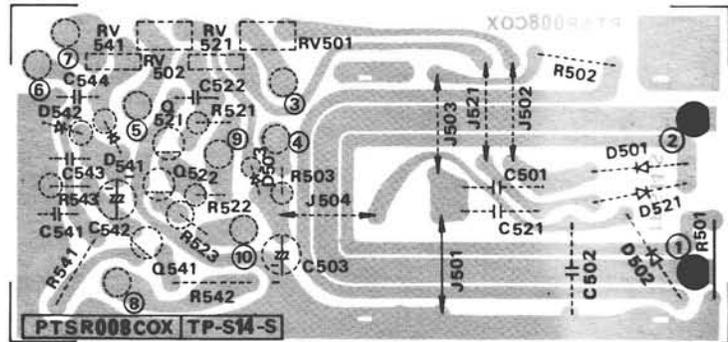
SWR & MOD Meter Printed Circuit Board – 14T303
